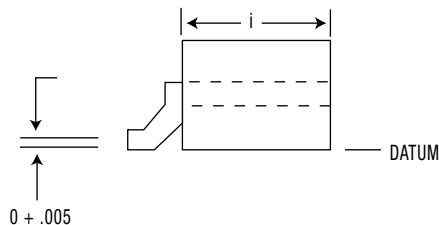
Surface Mount Tolerance for Components with Tabs
